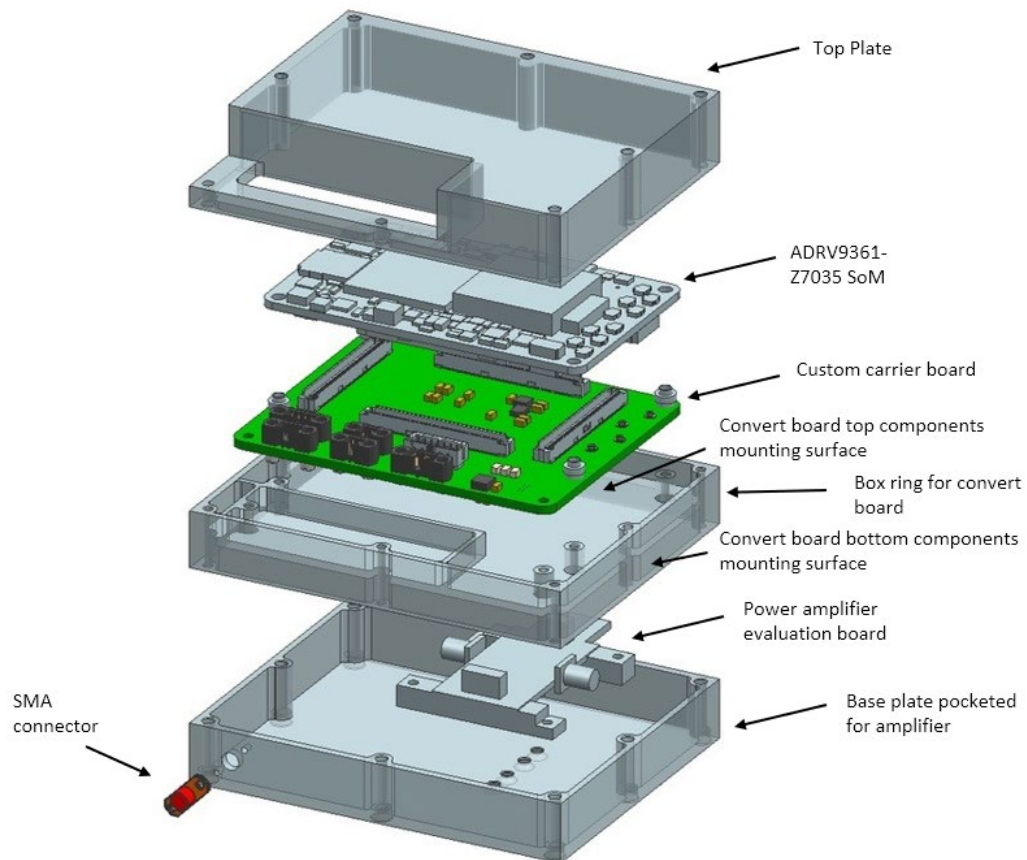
Radio assembly mechanical enclosure. Source: [4].
